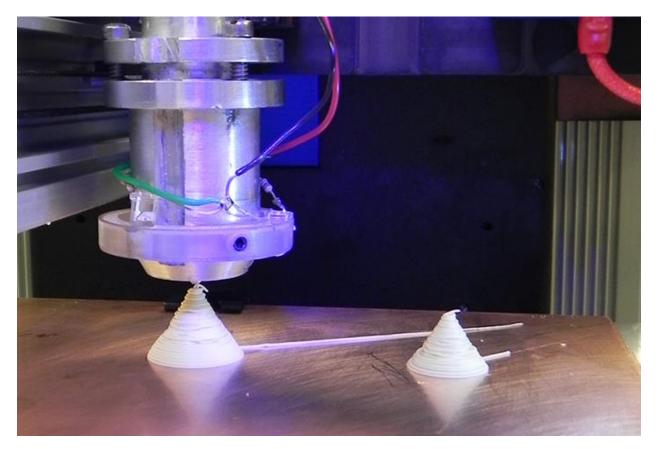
Los Alamos 3D Printed Explosive Cones [13]
